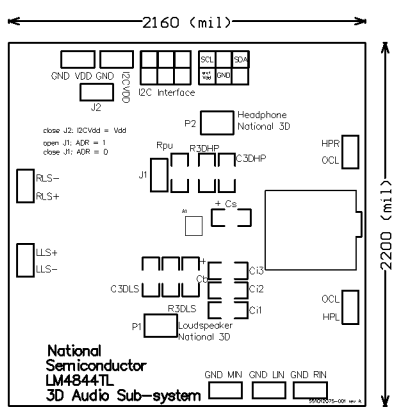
Recommended YZR PCB Layout: Silkscreen Layer
